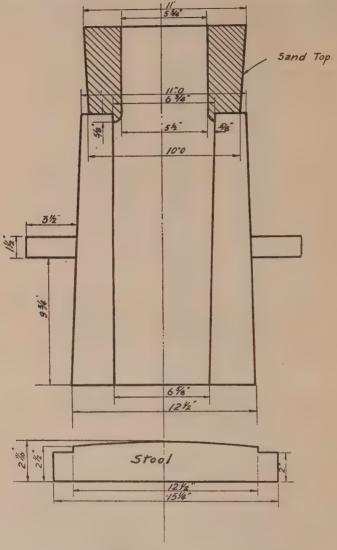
Open Bottom Mould for 6-inch Shell Ingot.
